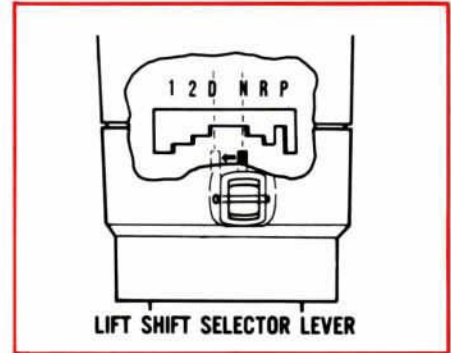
The First Step in Checking the Position of the Selector Lever and Manual Valve.
